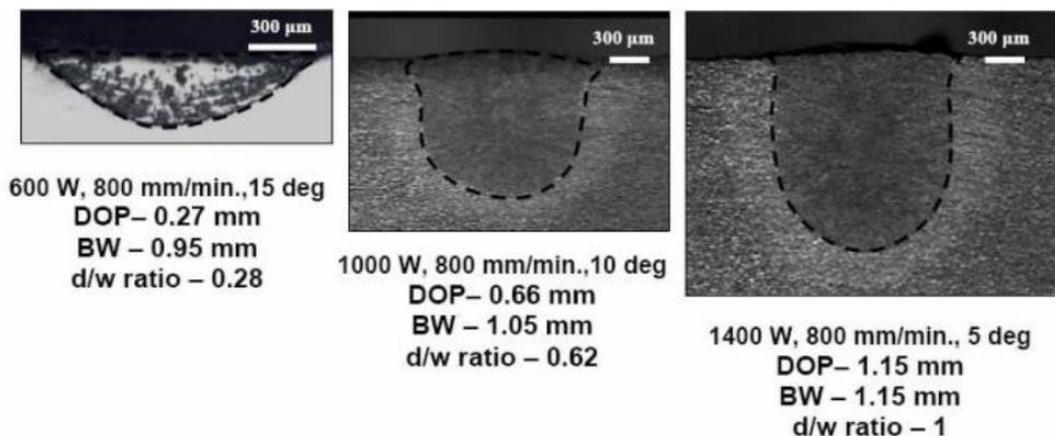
Macrograph photograph of weld profile with constant 800 mm/min speed [21].
